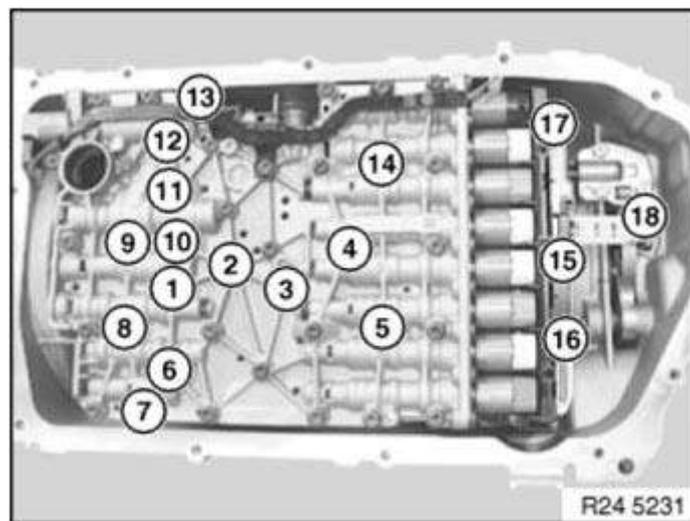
Identifying Tightening Sequence Of Mechatronics Screws
